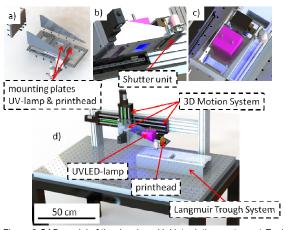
CAD-model of the developed inkjet printing system. a) Exploded view of the holding fixture. b) Side view of the holding fixture with UV-lamp and printhead inserted. c) Top view. d) CAD assembly of the Printing System.
